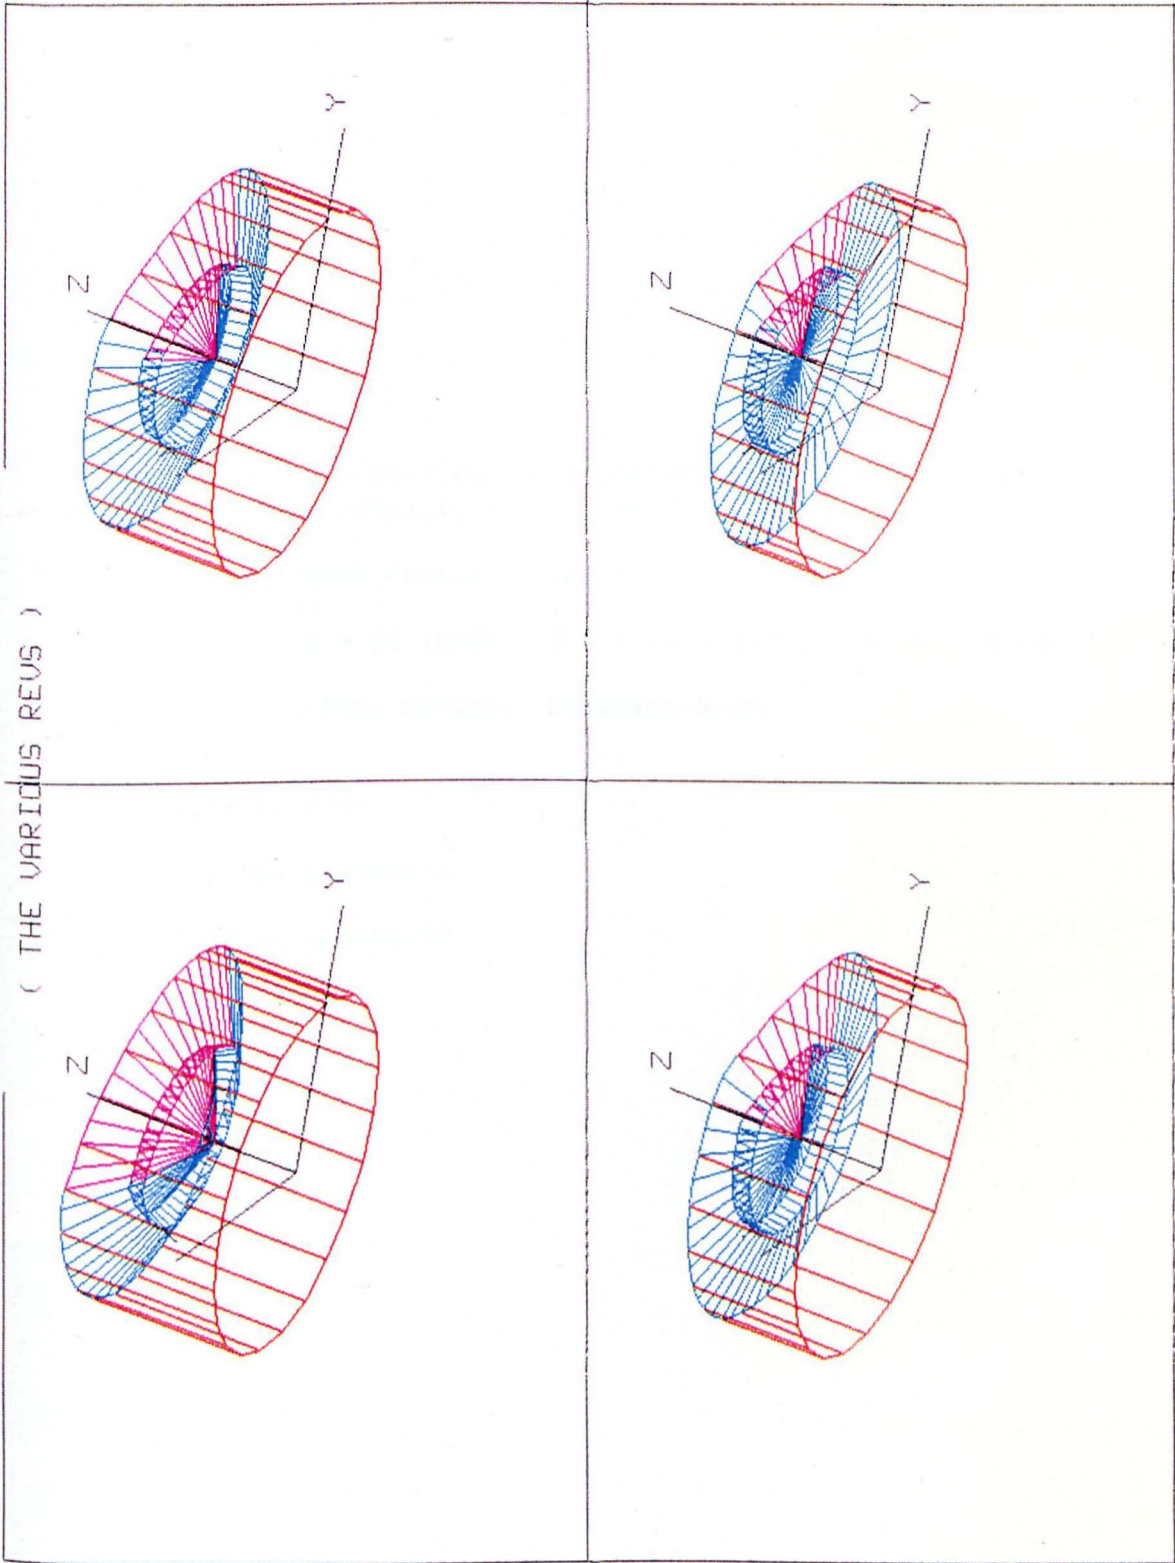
Illustration of a workpiece being deformed by a radially configured conic tool
